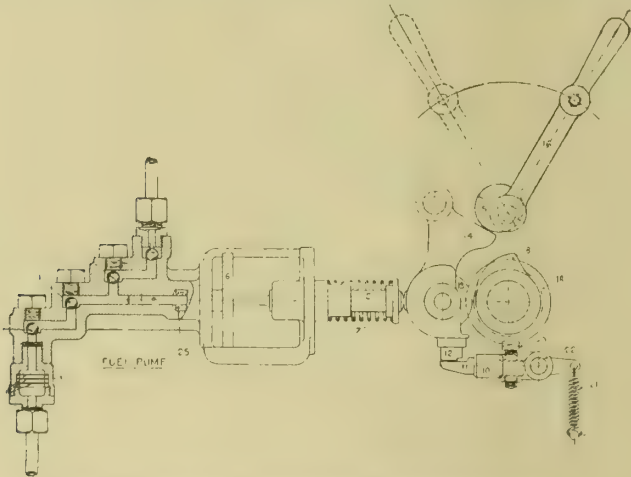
SECTION OF FUEL PUMP. CROSS OIL ENGINE.
